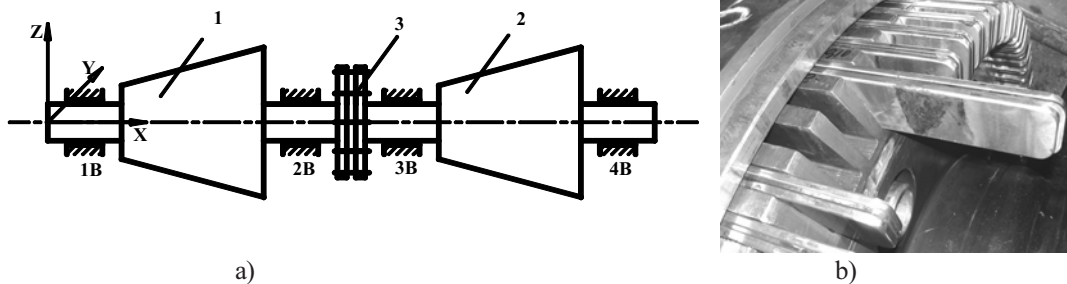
Rotors and bearings layout: a – rotating system, 1 – HPR, 2 – MLPR, 3 – TWC, 1B and 3B – radial-axial bearings, 2B and 4B radial bearing; b - view of TWC with plate packets
